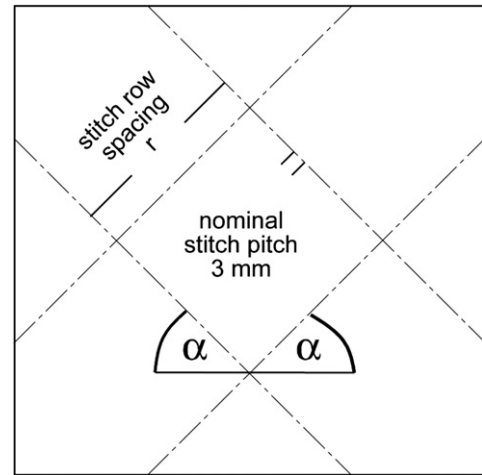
Schematic representation of the assembly seam stitching pattern used in this study.
